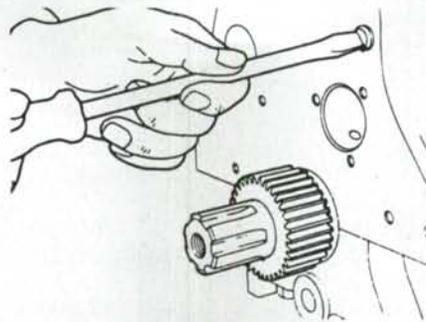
View showing removal of oil supply restrictor for timing gears. Clean with compressed air, then reinstall.
